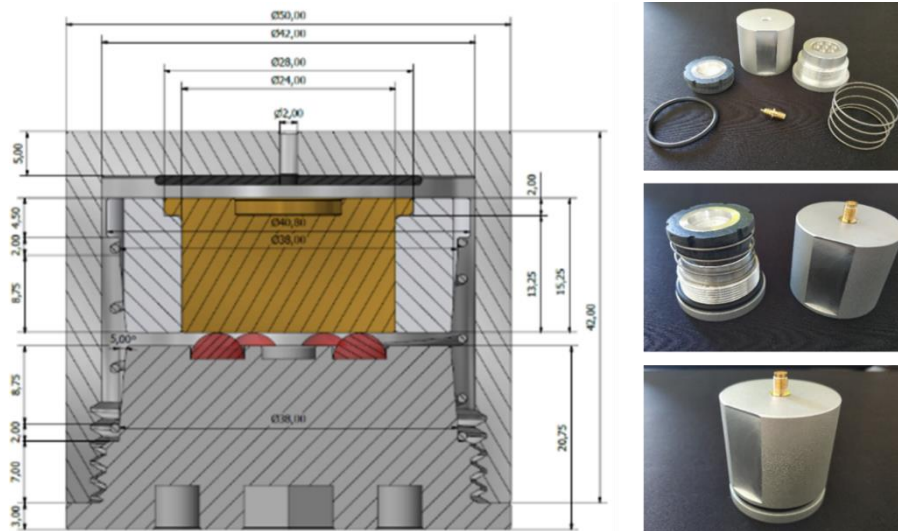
Improved VEH prototype: 2D cross-section diagram, disassembled, partially assembled and mounted prototype.
